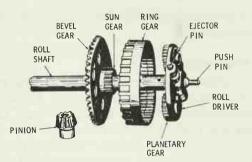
The planetary-gear assembly of a rotary ironer with an automatically operating shoe.
